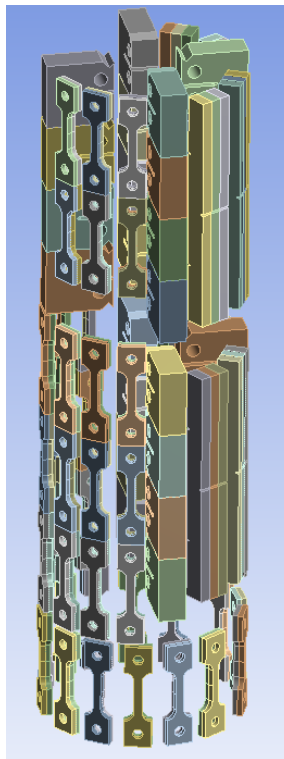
Specimen Design Layout for the 250°C Subcapsule.
